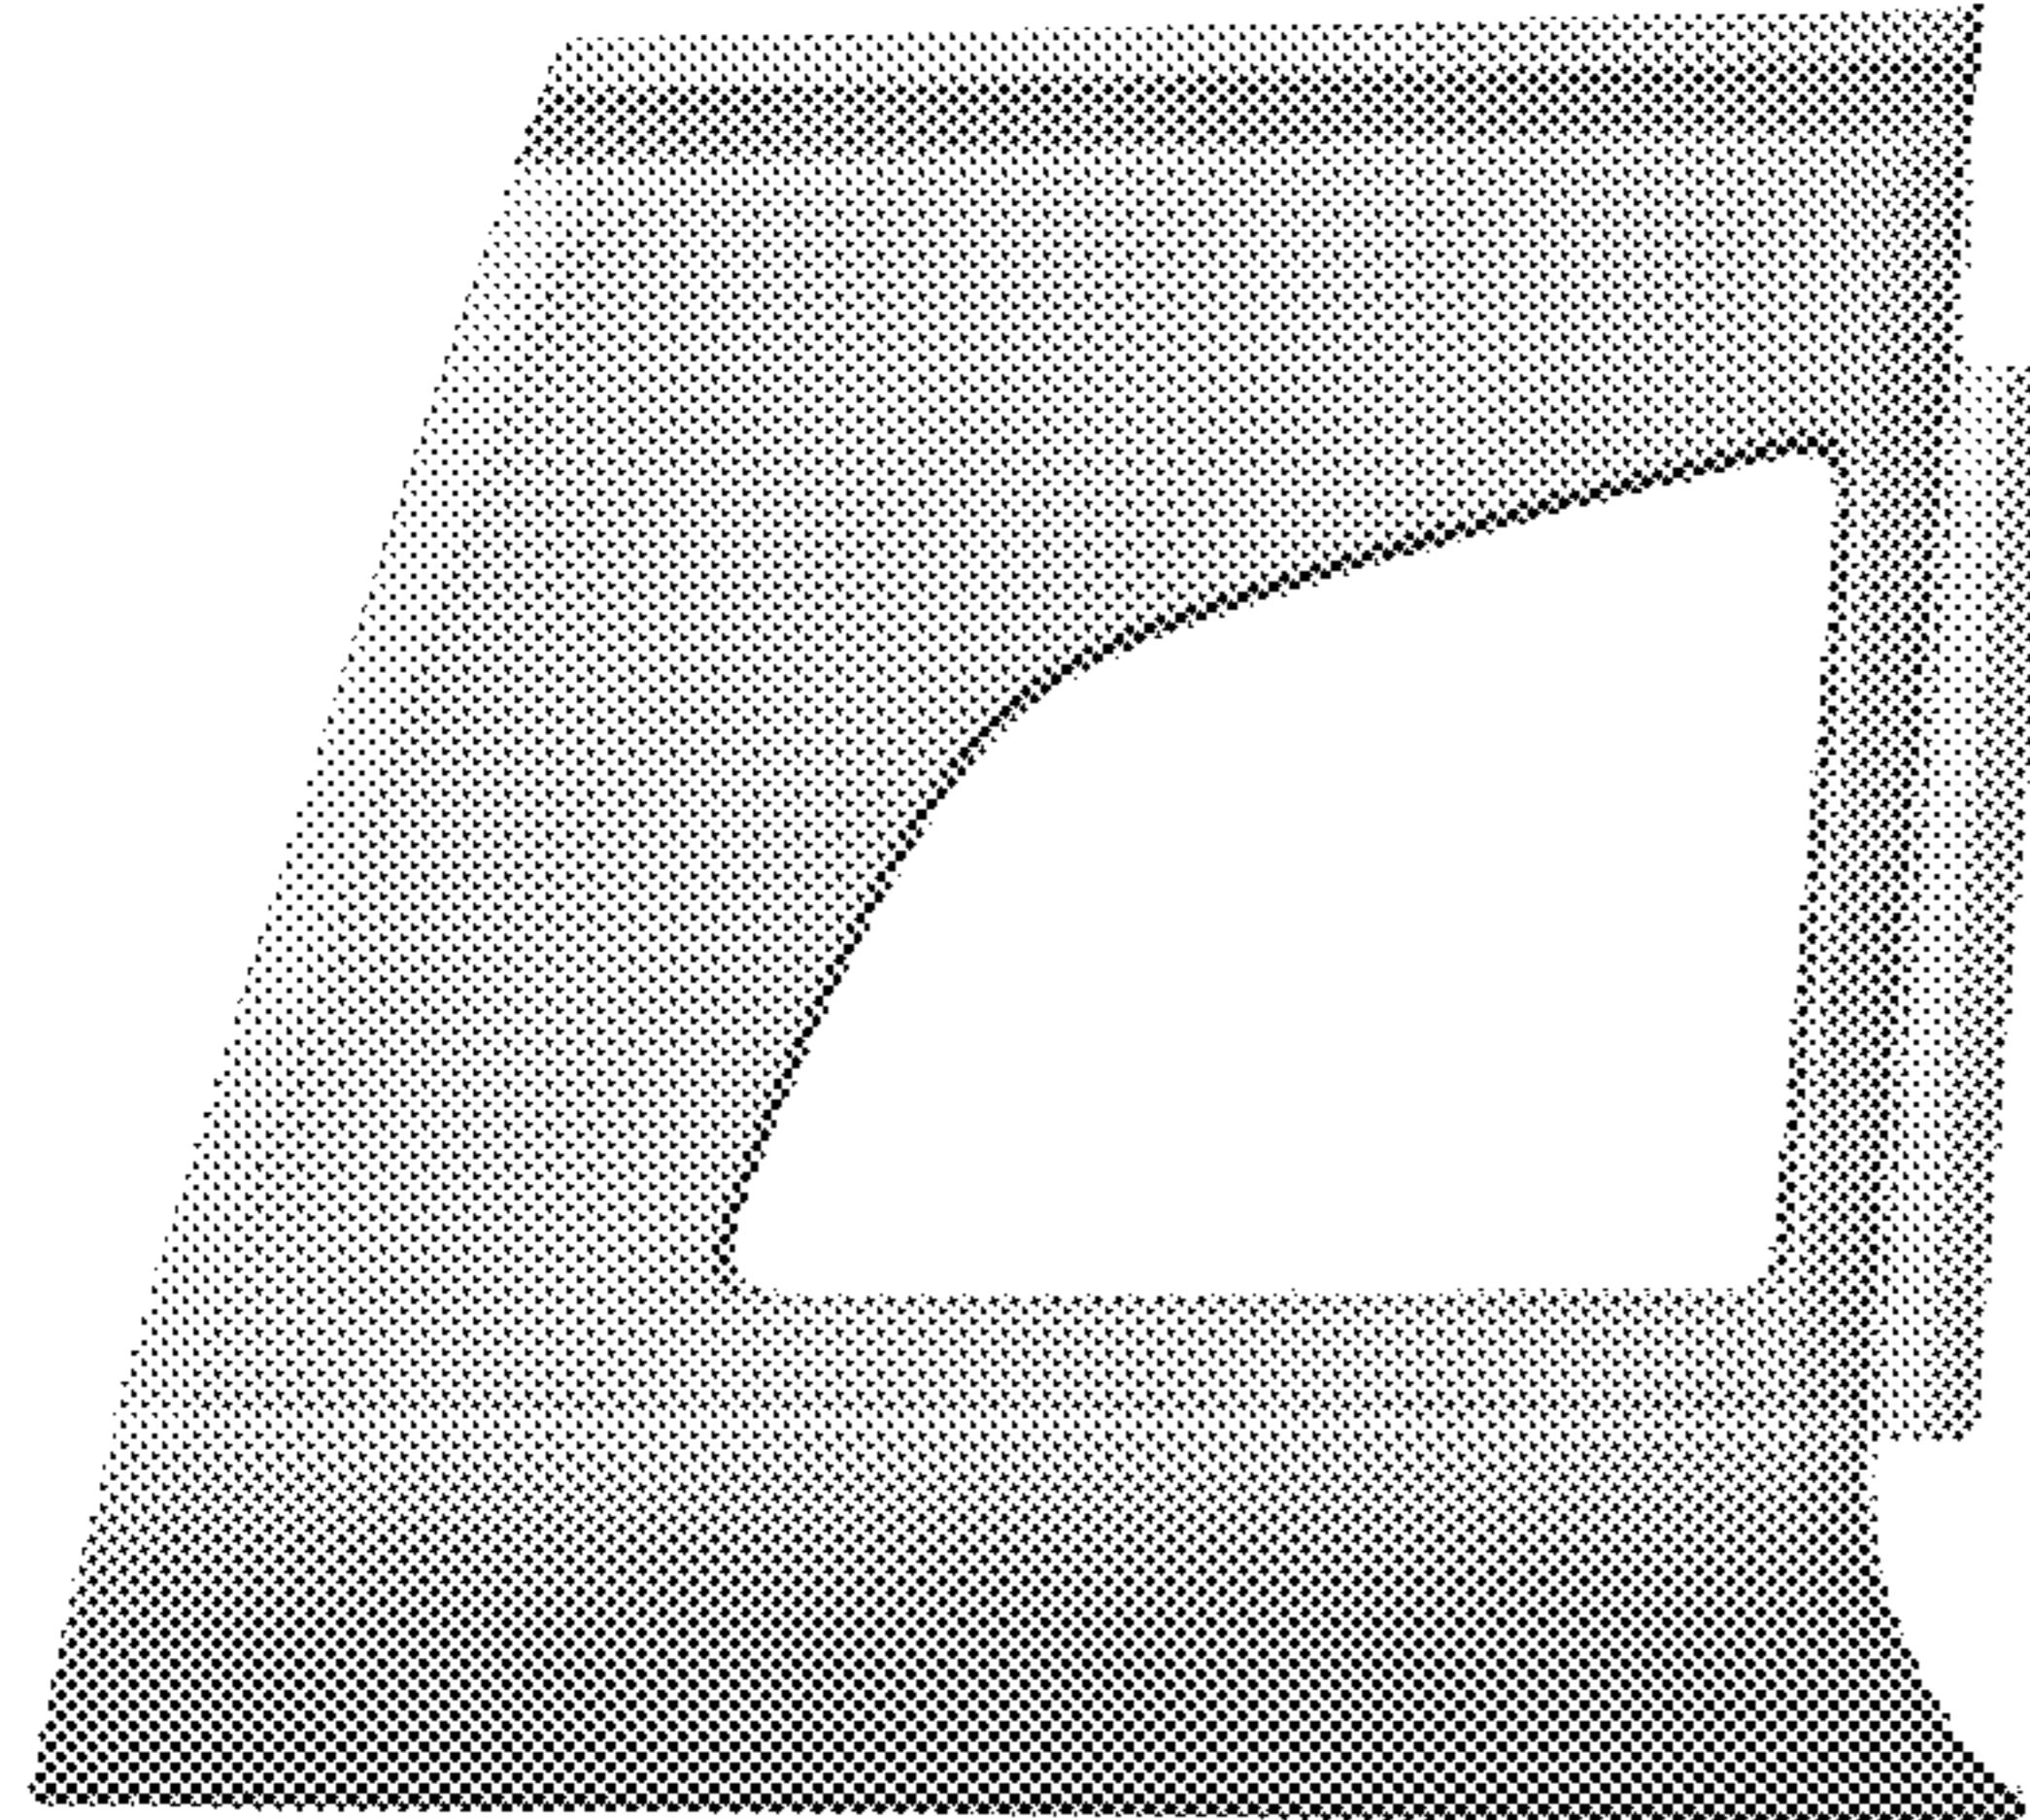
is a top left perspective view of a bumper component showing our new design.
